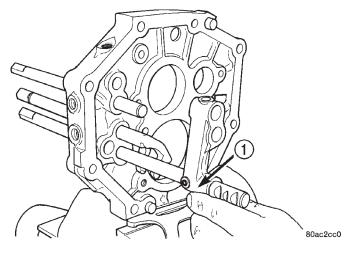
Remove Reverse Shift Head And Rail Assembly
